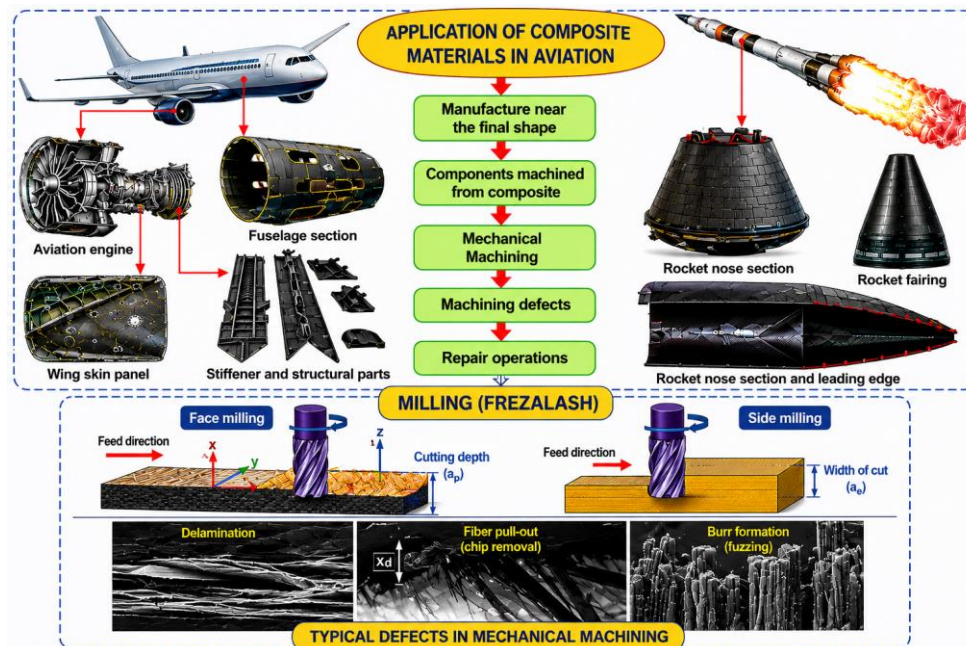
Application of composite-material components in aerospace engineering and typical defects occurring during milling.
